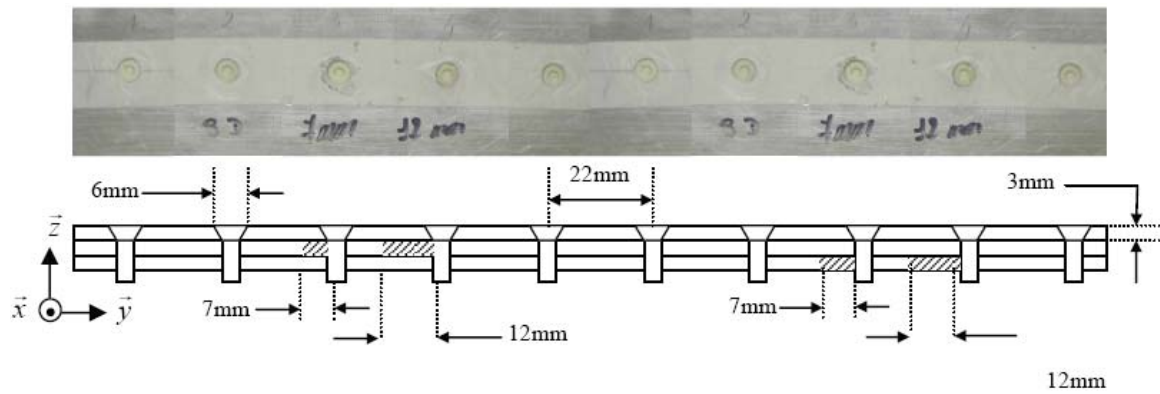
Laboratory made lap joint mock-up with sound and flawed rivets. Reconstituted photograph (top view), and schematic representation (side view).
